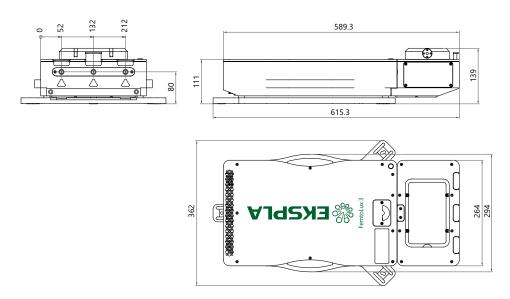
Outline drawings of FemtoLux 3 laser head with second harmonic option
